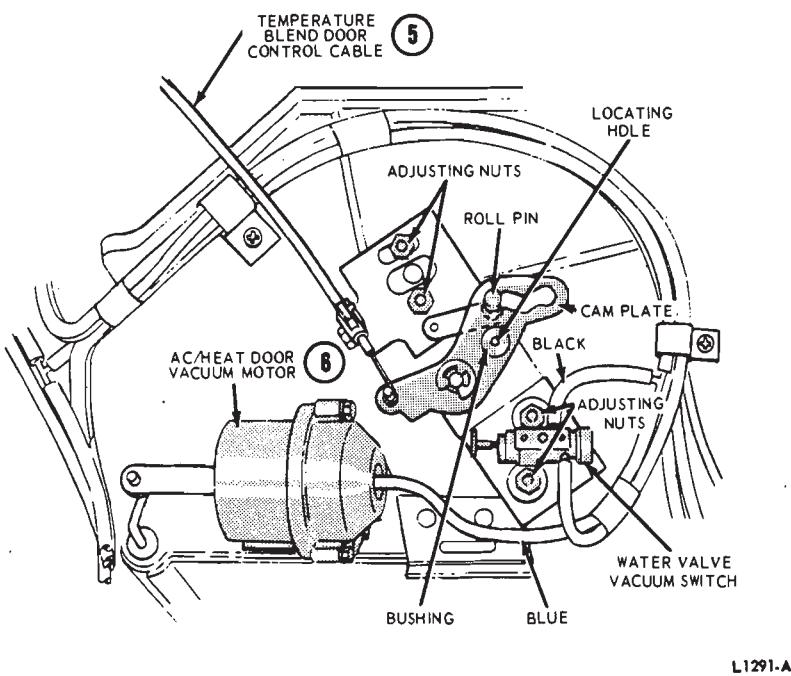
Temperature Blend Door (5) Control Cable Bracket Assembly—Falcon, Fairlane, and Montego
